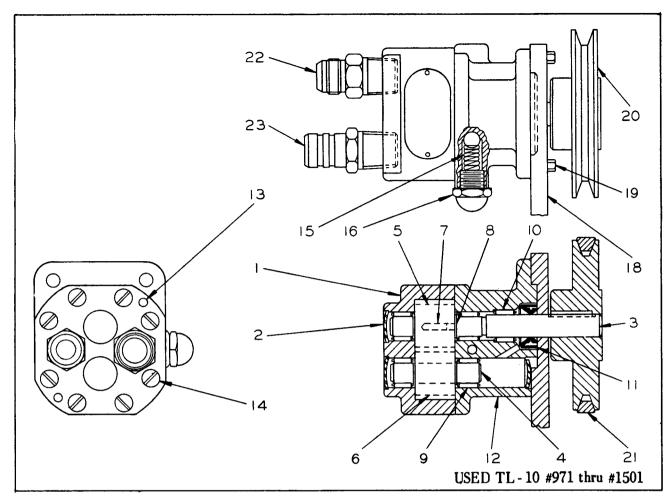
CONVERTER PUMP MOUNTING AND DRIVE GROUP - (For Conventional Steering)
